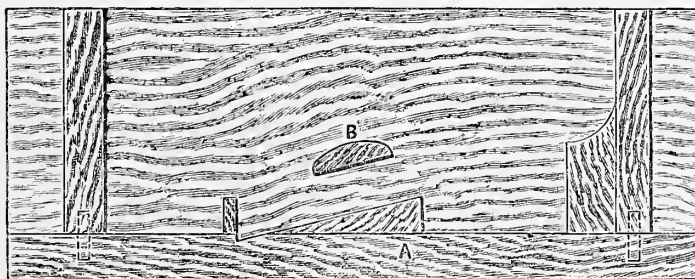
Core Box, viewed from Top. Fig. 9 A.—View of Side and Section.
